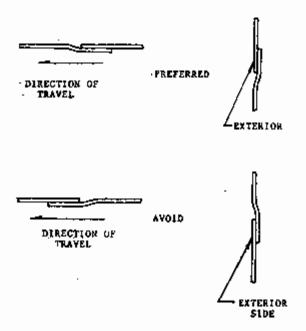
DIRECTION OF LAPS IN SHEET METAL JOINTS
